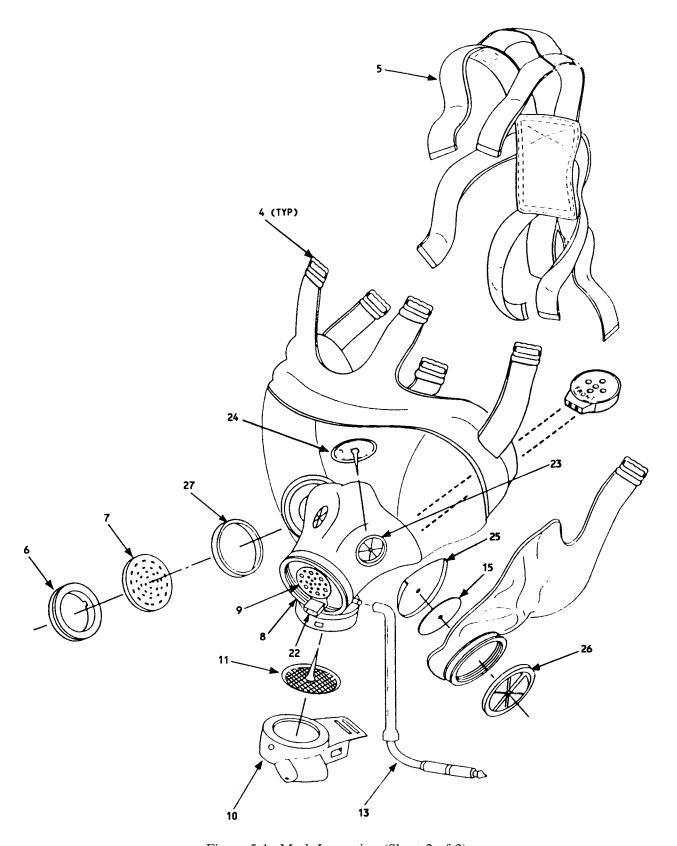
Mask Inspection (Sheet 2 of 3)
